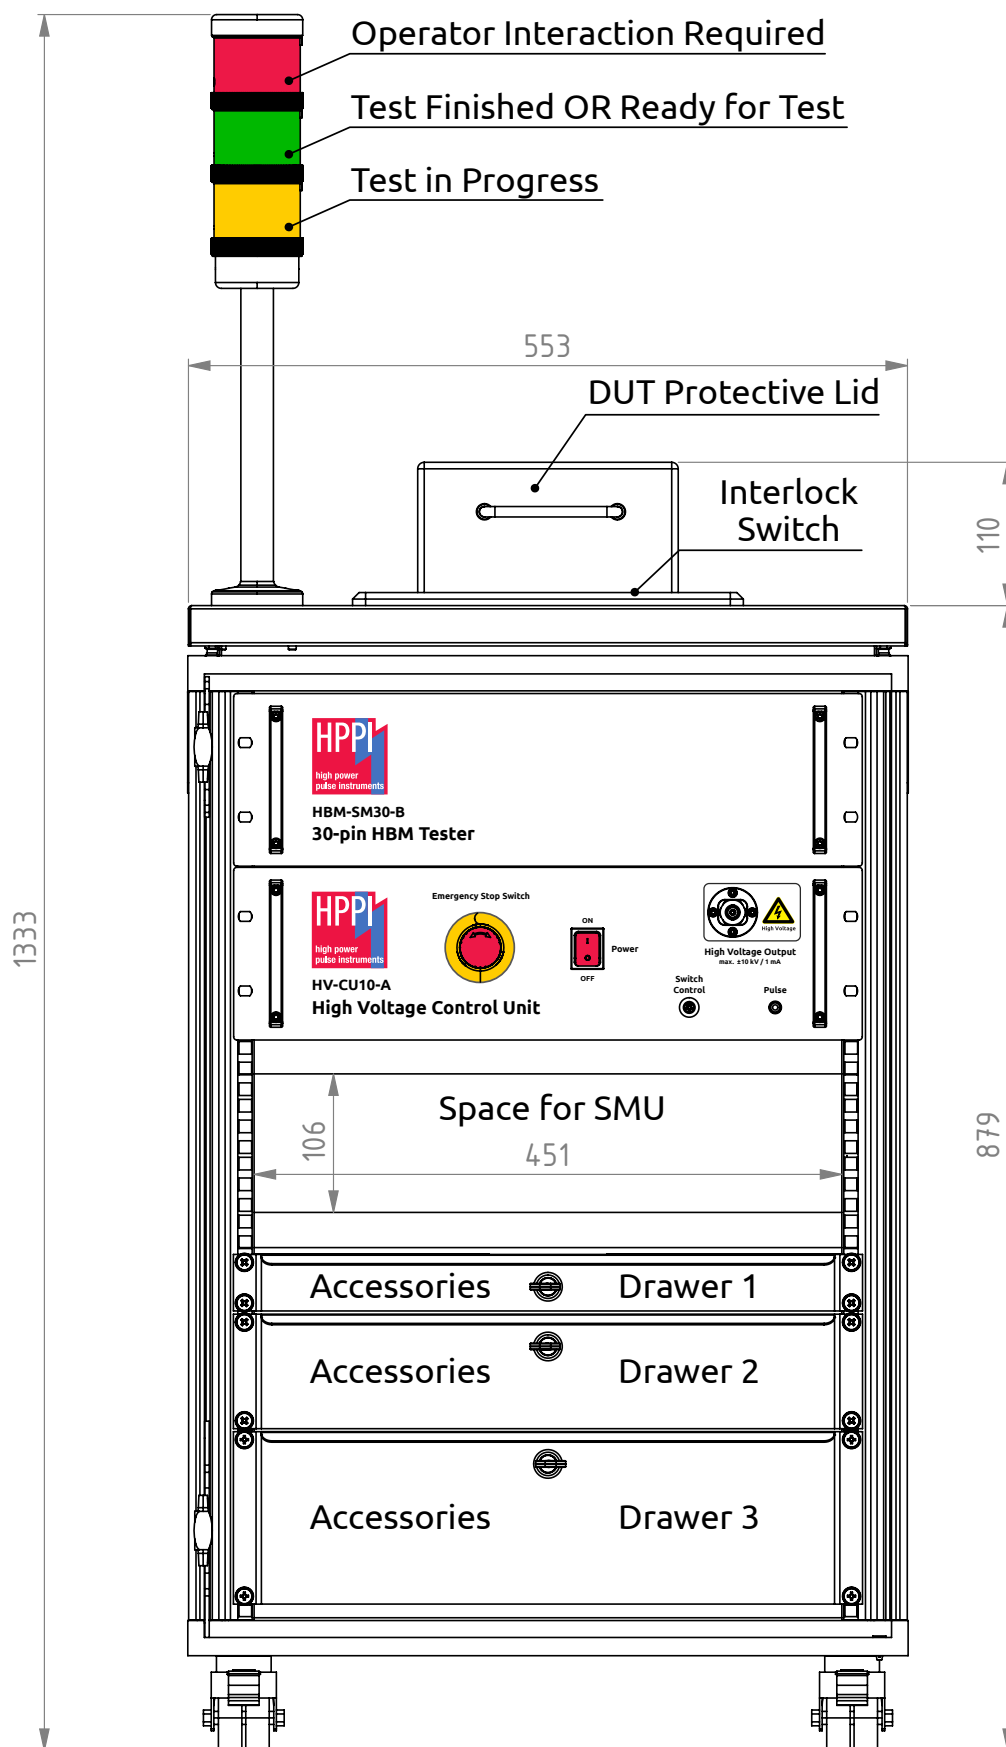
HBM-SM30-B front side view. Dimensions in [mm].
